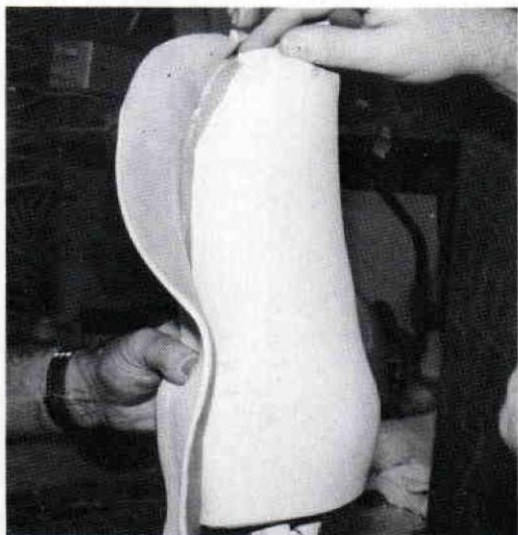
A one-inch overlap is made of the insert material after molding around the positive mold.
